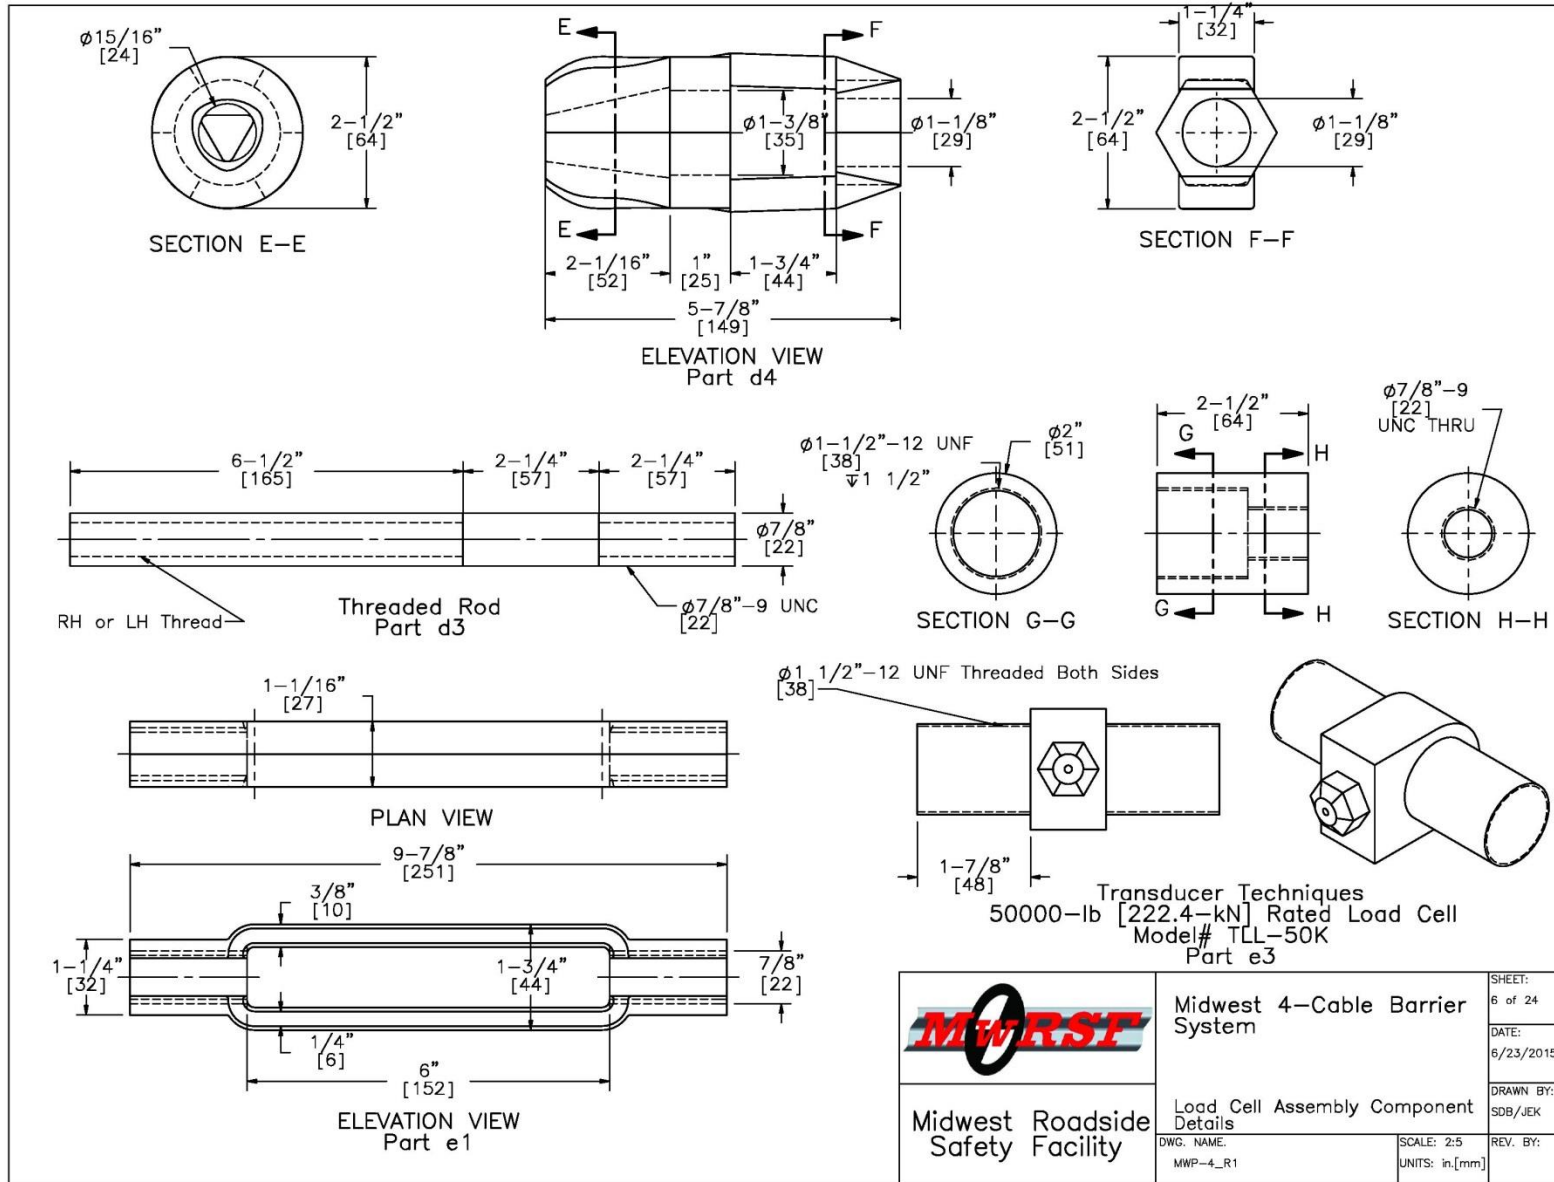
Load Cell Assembly Details, Test No. MWP-4
